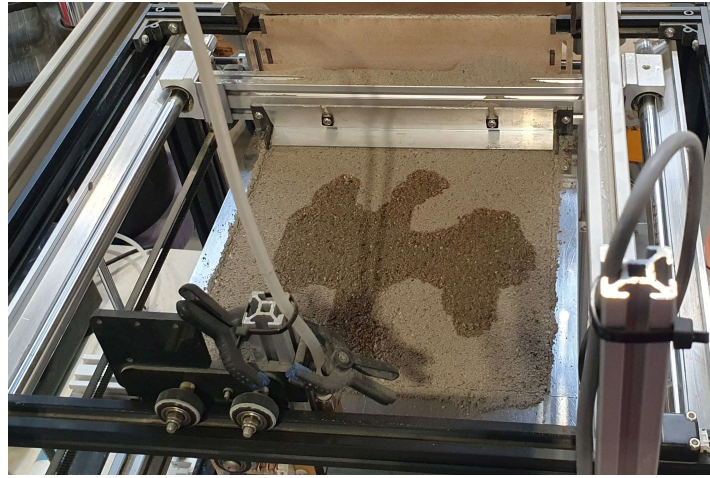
Printing process showing one layer of water deposited in the specific shape.
